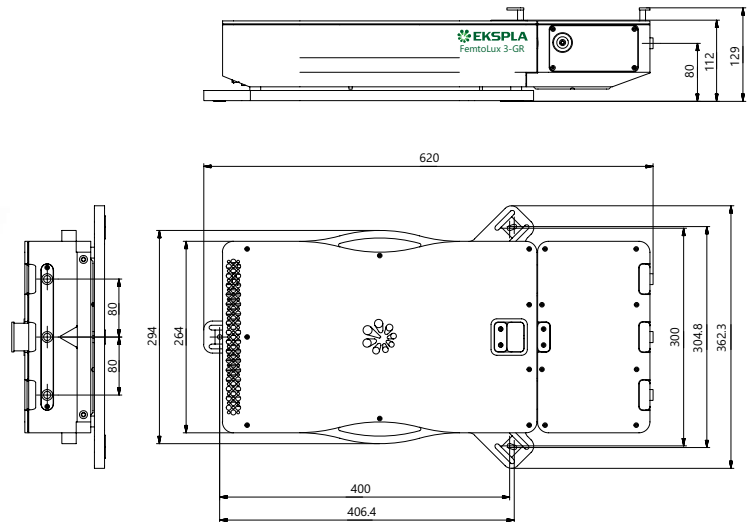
Outline drawings of FemtoLux 3-GR laser head with second harmonic option
